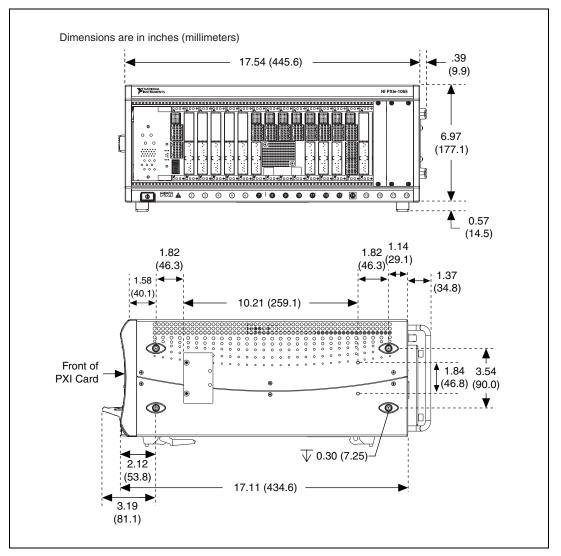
NI PXIe-1065 Chassis Dimensions (Front and Side)
